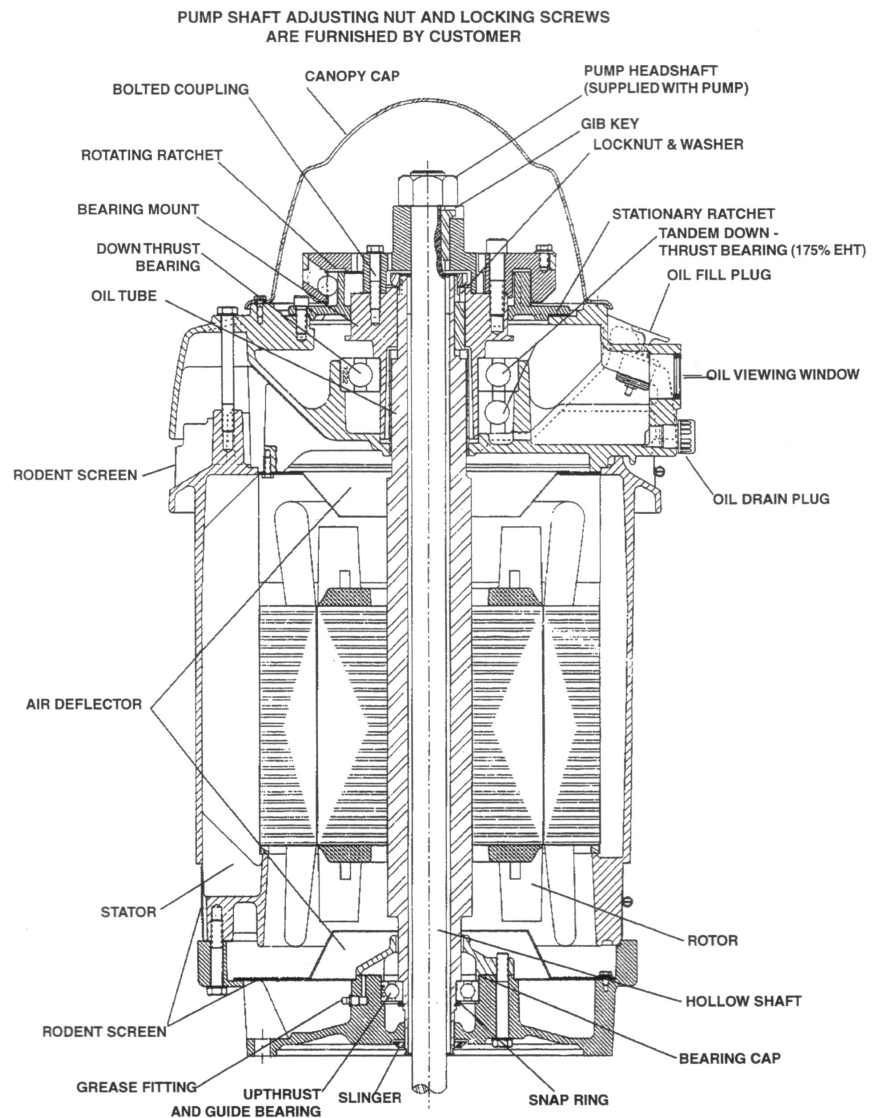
Typical motor construction; refer to assembly drawing and information provided by the motor manufacturer for details on your particular motor.
